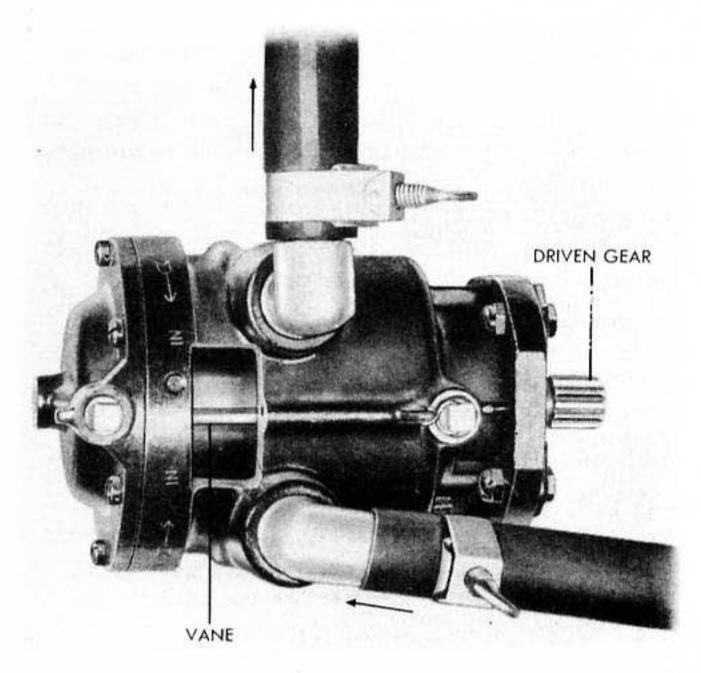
VACUUM PUMP - CUTAWAY VIEW
